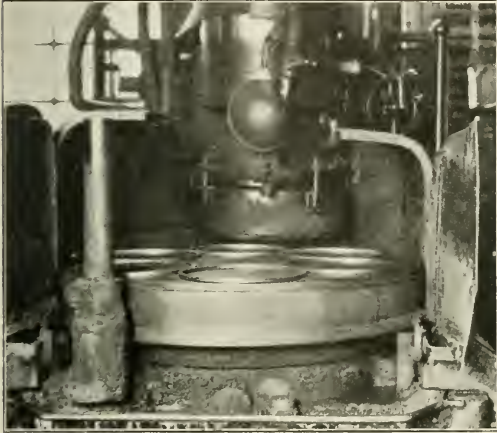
Rotary Surface Grinder Equipped with Magnetic Chuck Grinding Packing Rings
